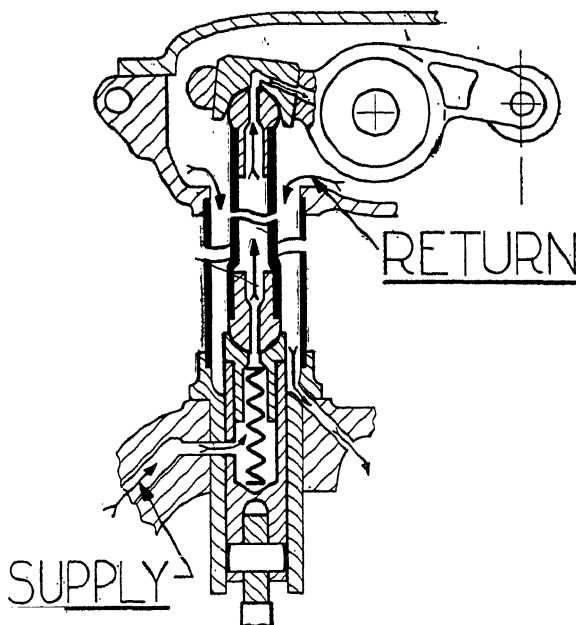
Valve gear lubrication method used on Wright "Cyclone" engines.
